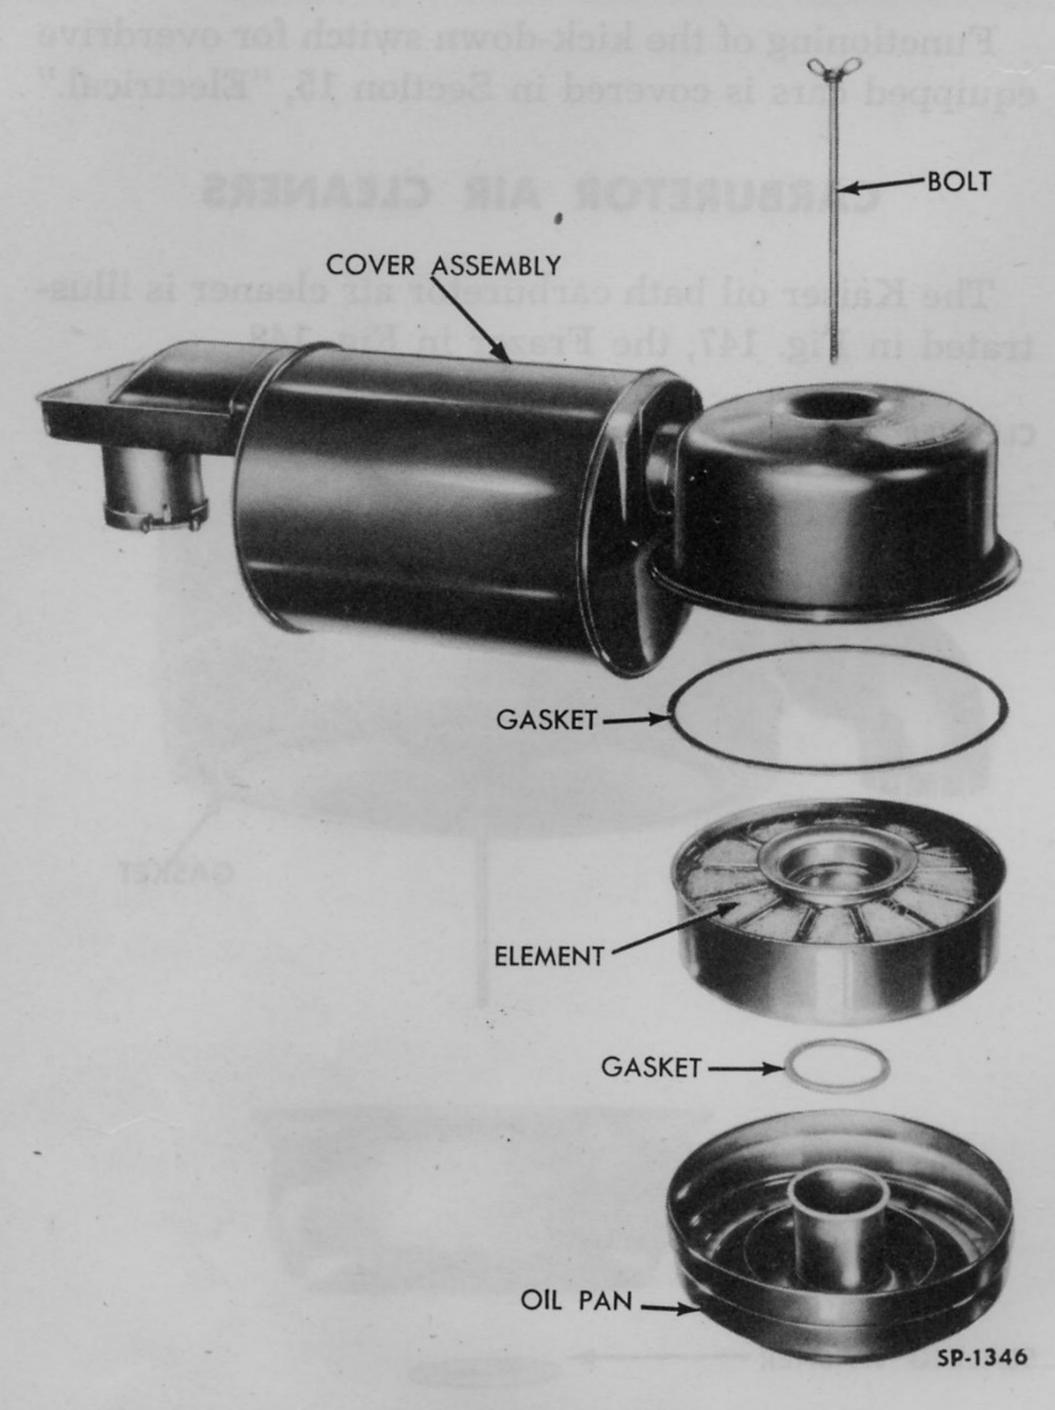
Frazer Oil-Bath Type Carburetor Air Cleaner
